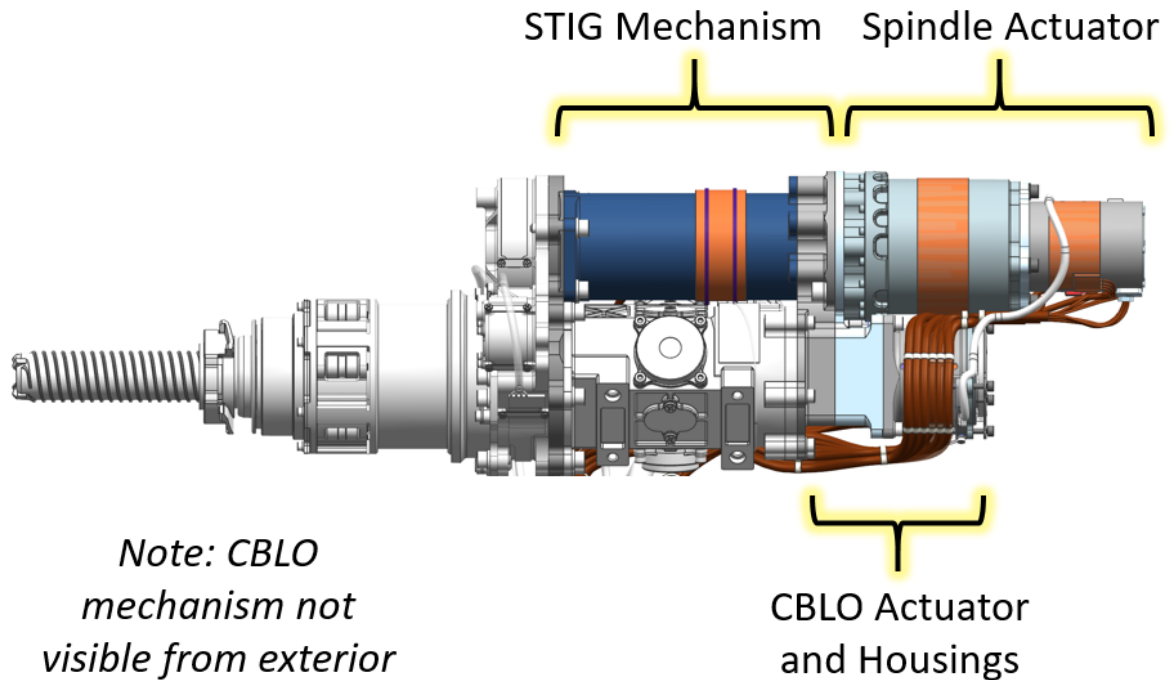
The STIG mechanism, spindle actuator, and Core Break Lockout (CBLO) actuator are shown in the context of the Mars 2020 corer.
